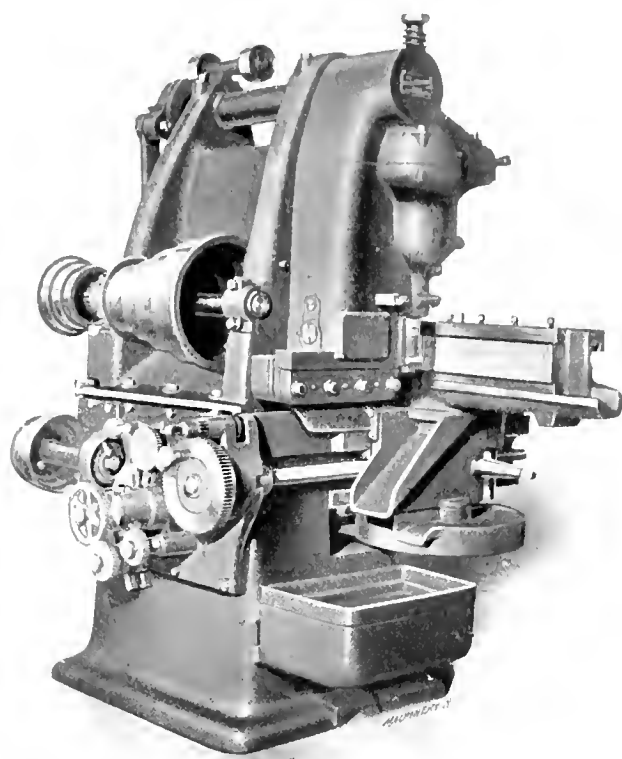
The Fellows Gear Shaper, with Rack-cutting Attachment.
